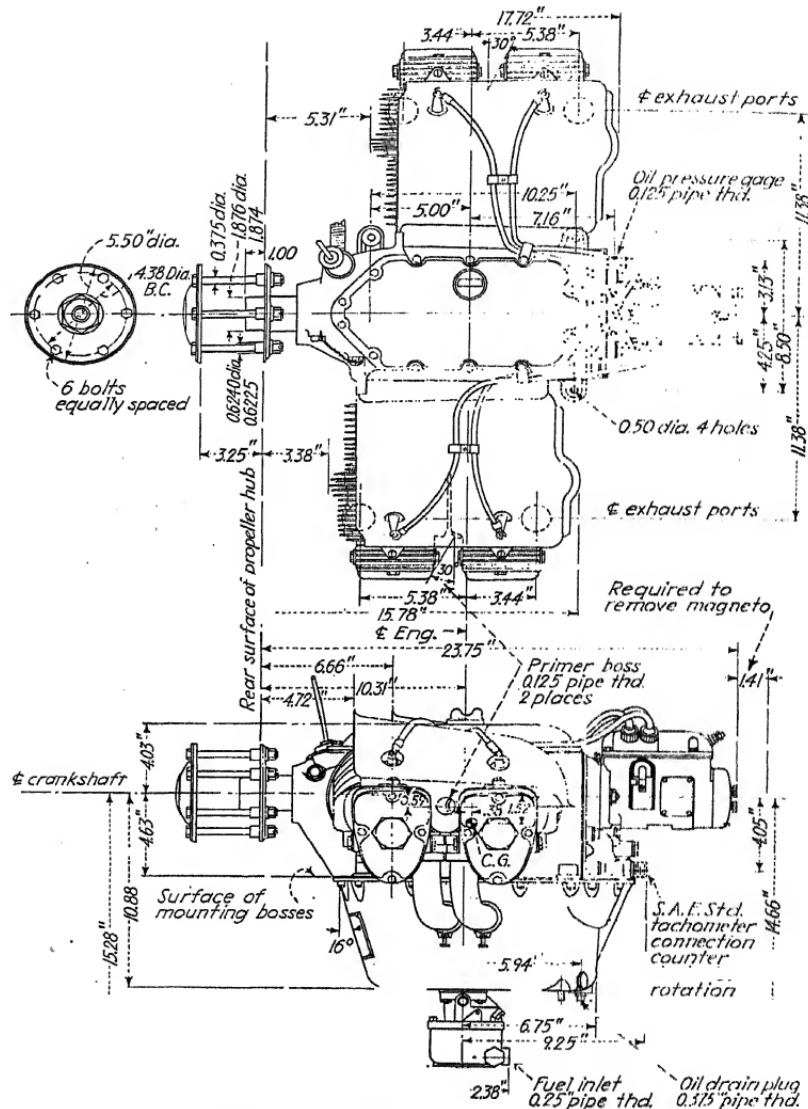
Installation drawings of Lycoming O-145-type engine.
